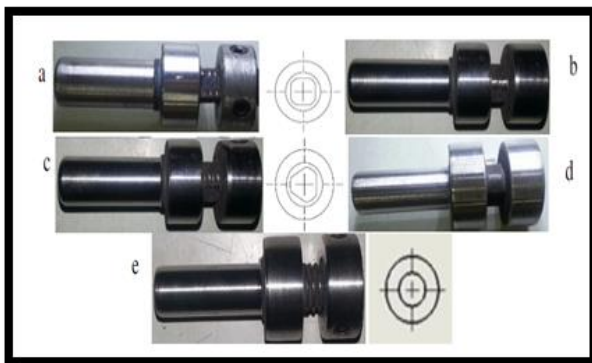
Straight cylindrical with 4 flat surfaces that are threaded, straight cylindrical with 3 flat surfaces that are threaded, and straight cylindrical pins with 3 flat surfaces that are threaded[38].
